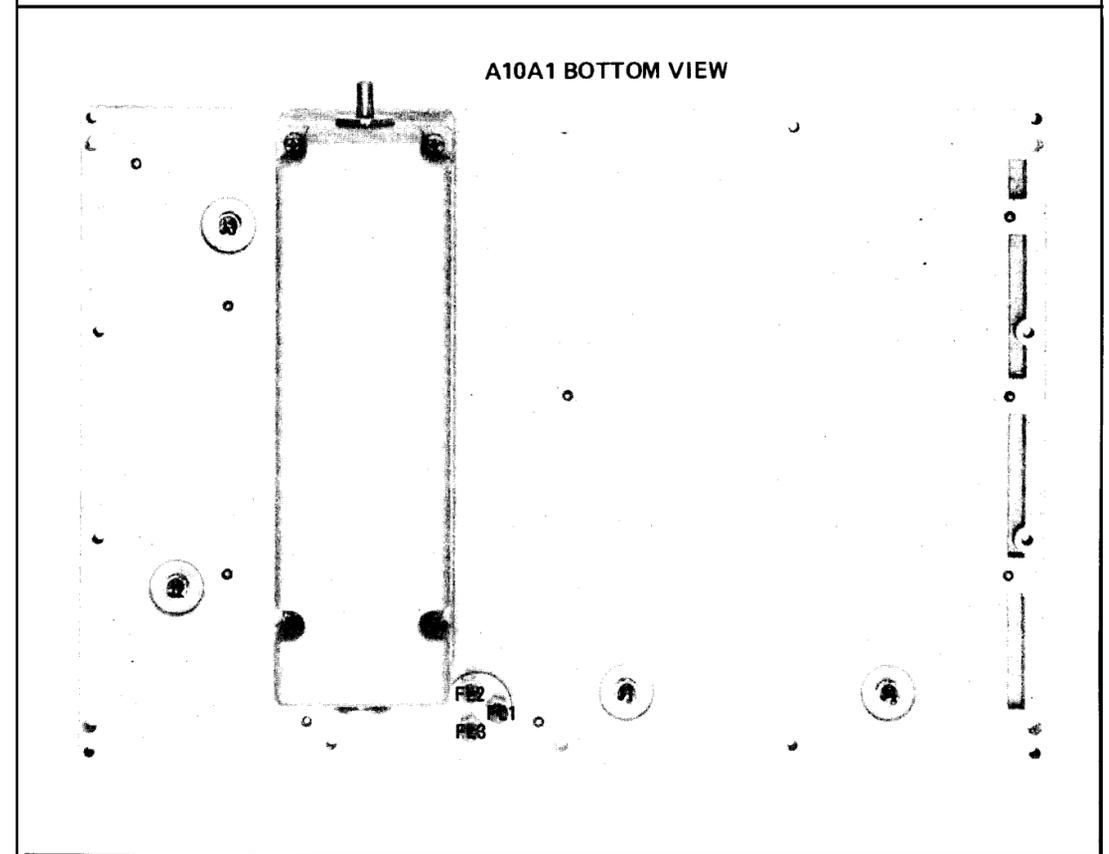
A10A1 RF Filter Assembly Component Locations (1 of 2)
